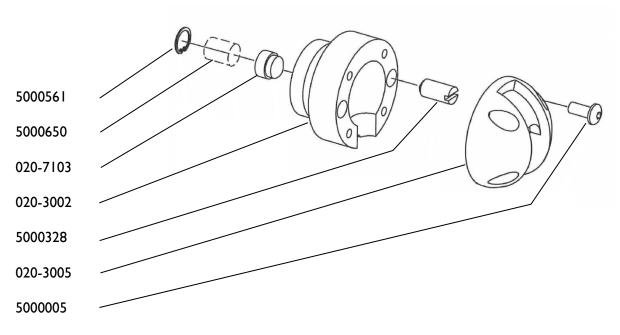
Q3 Dummy Shoulder Swivel Assembly (020-3000)
